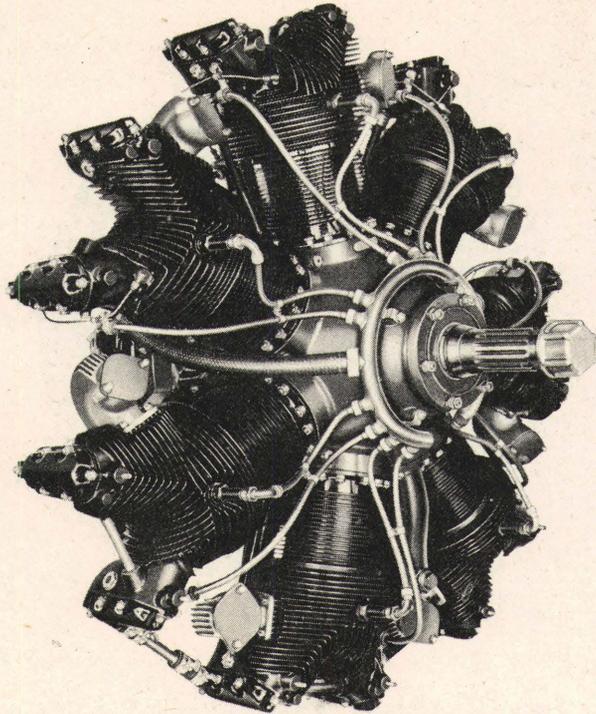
Right Front View of R-670-6 Engine Showing Radio-Shielded Ignition Harness
